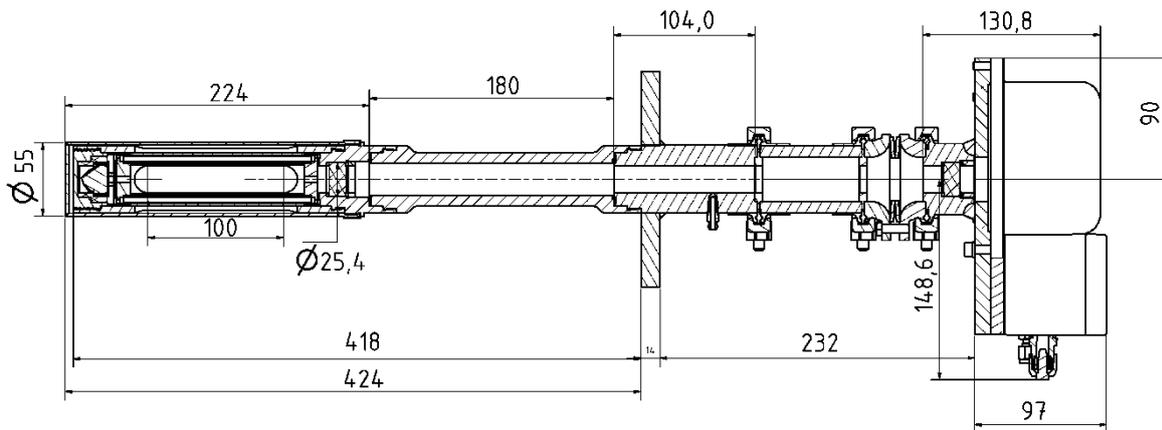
Technical drawing ILA1-B000-EX-PXX20 with alignment and insulation unit, filter and extension
